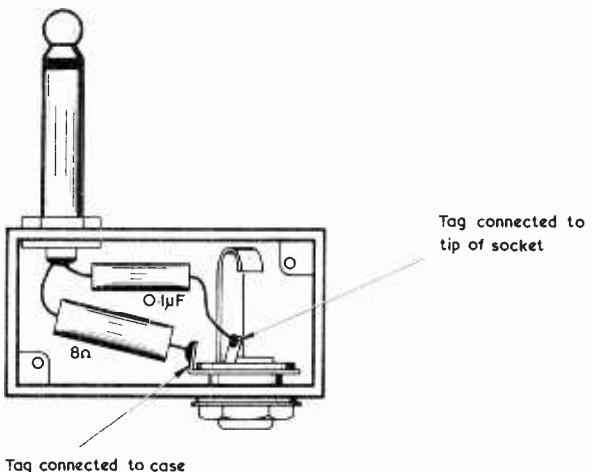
A particularly neat construction is given by mounting the resistor and capacitor in a modified ex-Government transformer unit type MC-385-D
